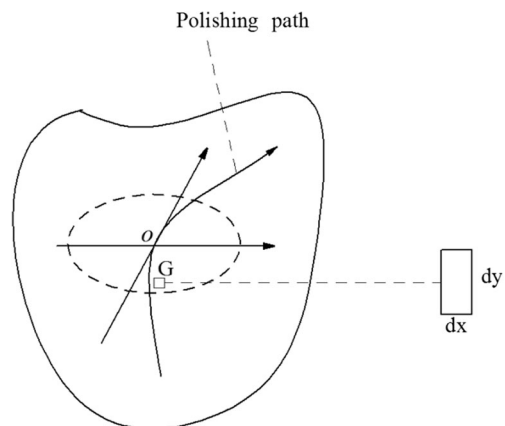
Schematic diagram of the contact area between the tool and the workpiece
